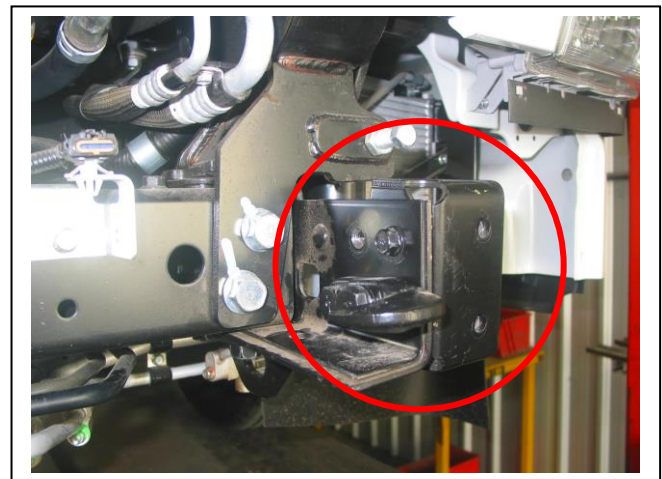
Grind off remaining weld. Drivers side shown
